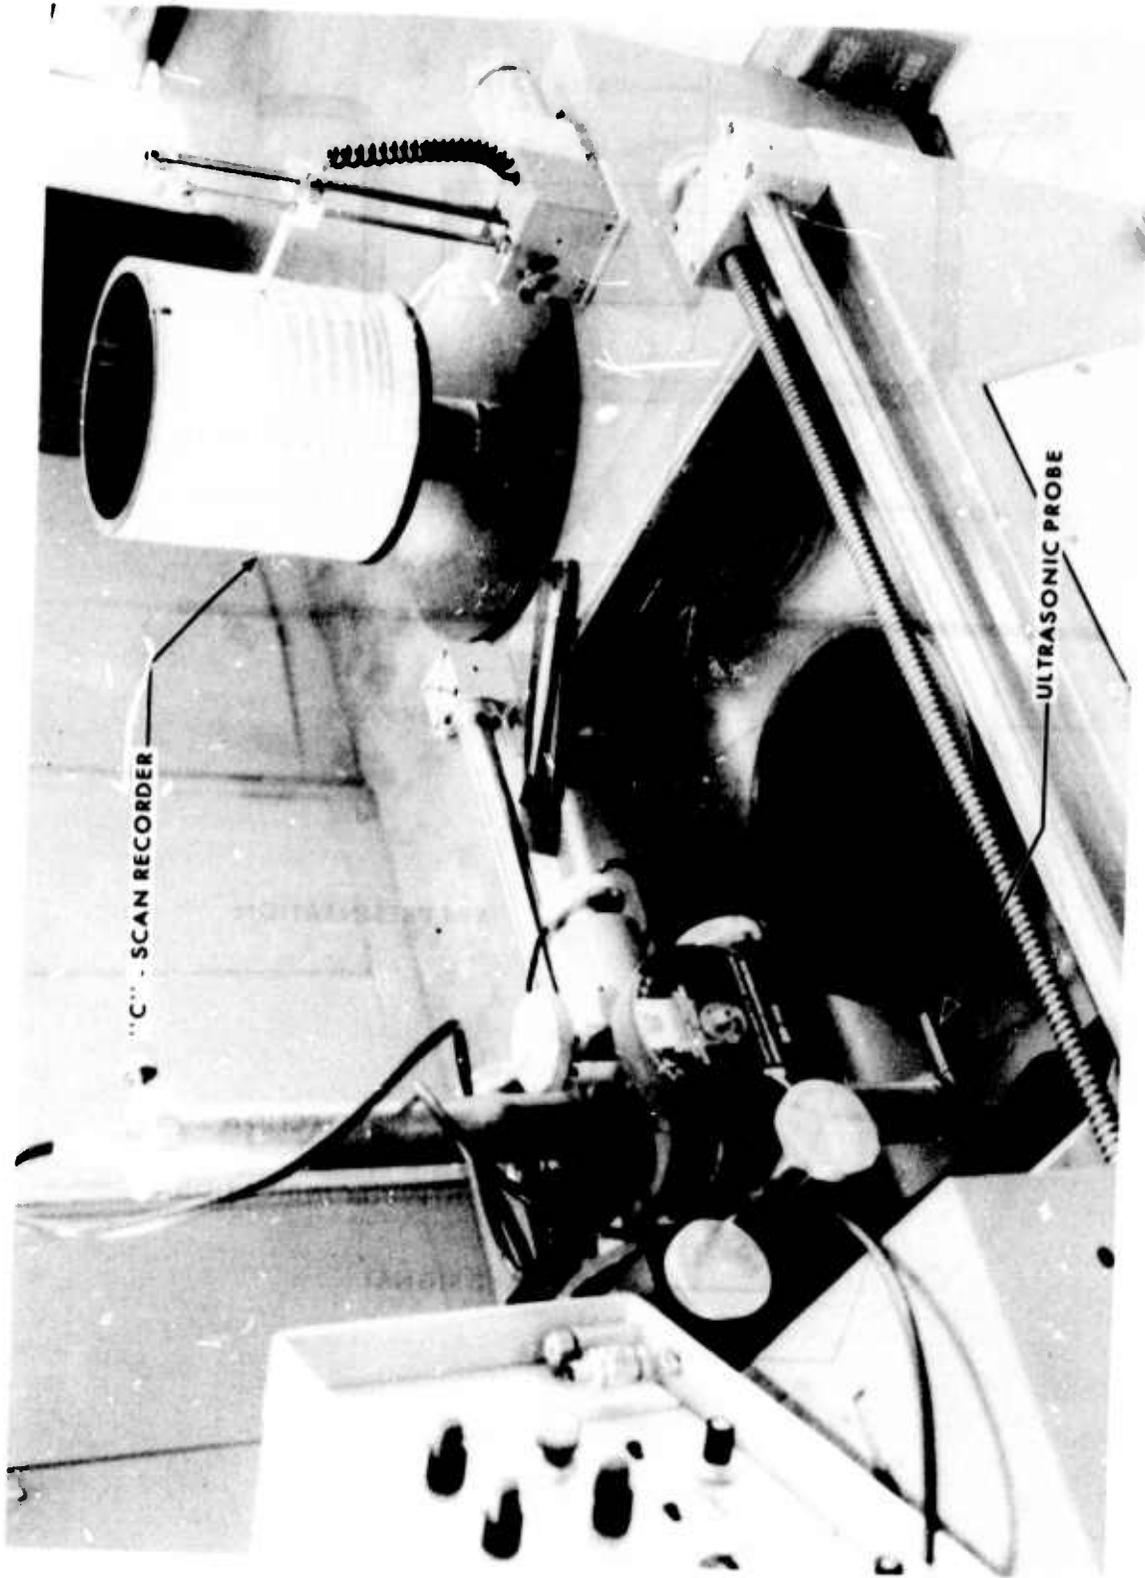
Ultrasonic Inspection, Full Immersion Technique.
